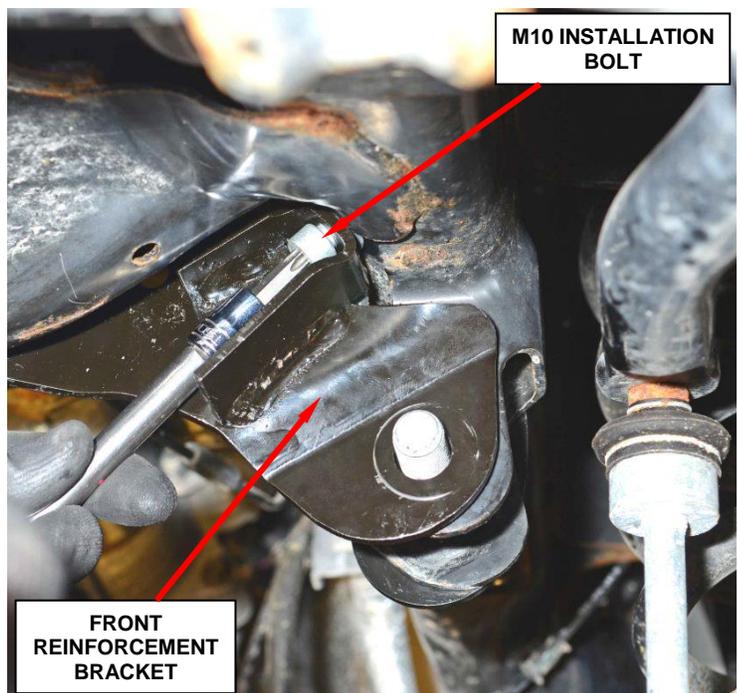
Crimp Riv-Nut with M10 Installation Bolt
